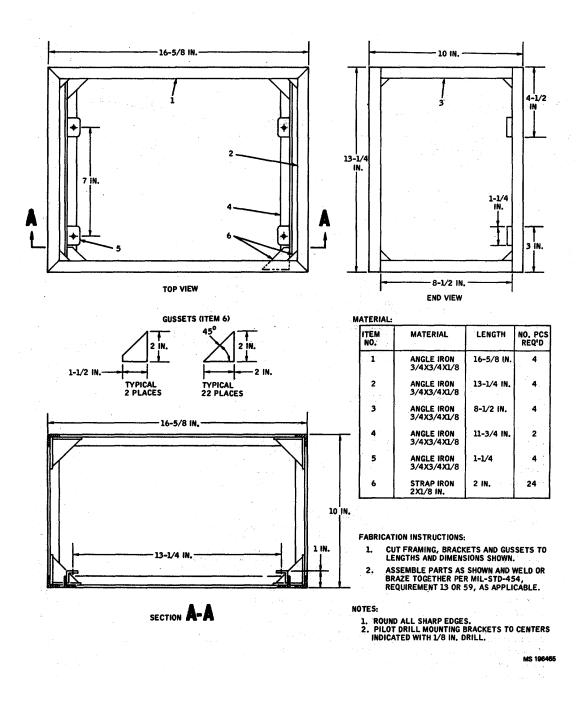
Printer Maintenance Frame Fabrication Drawing
